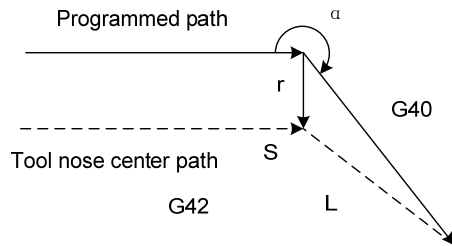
Circular-linear (moving inner and canceling offset)
